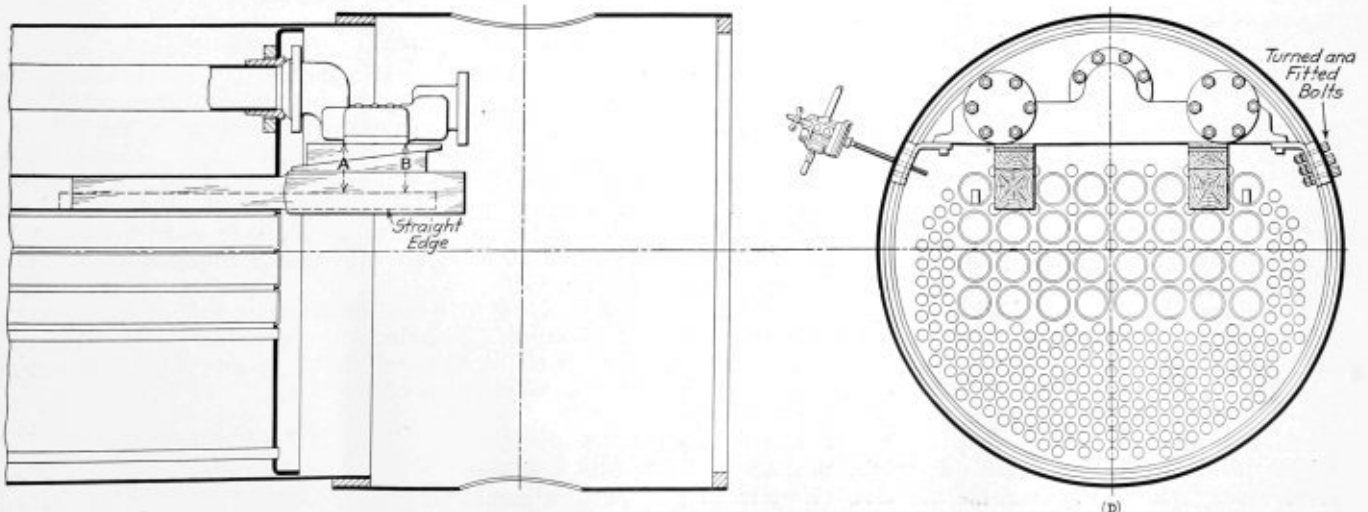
Installation of the Superheater Header and Method of Properly Locating Header Supports
